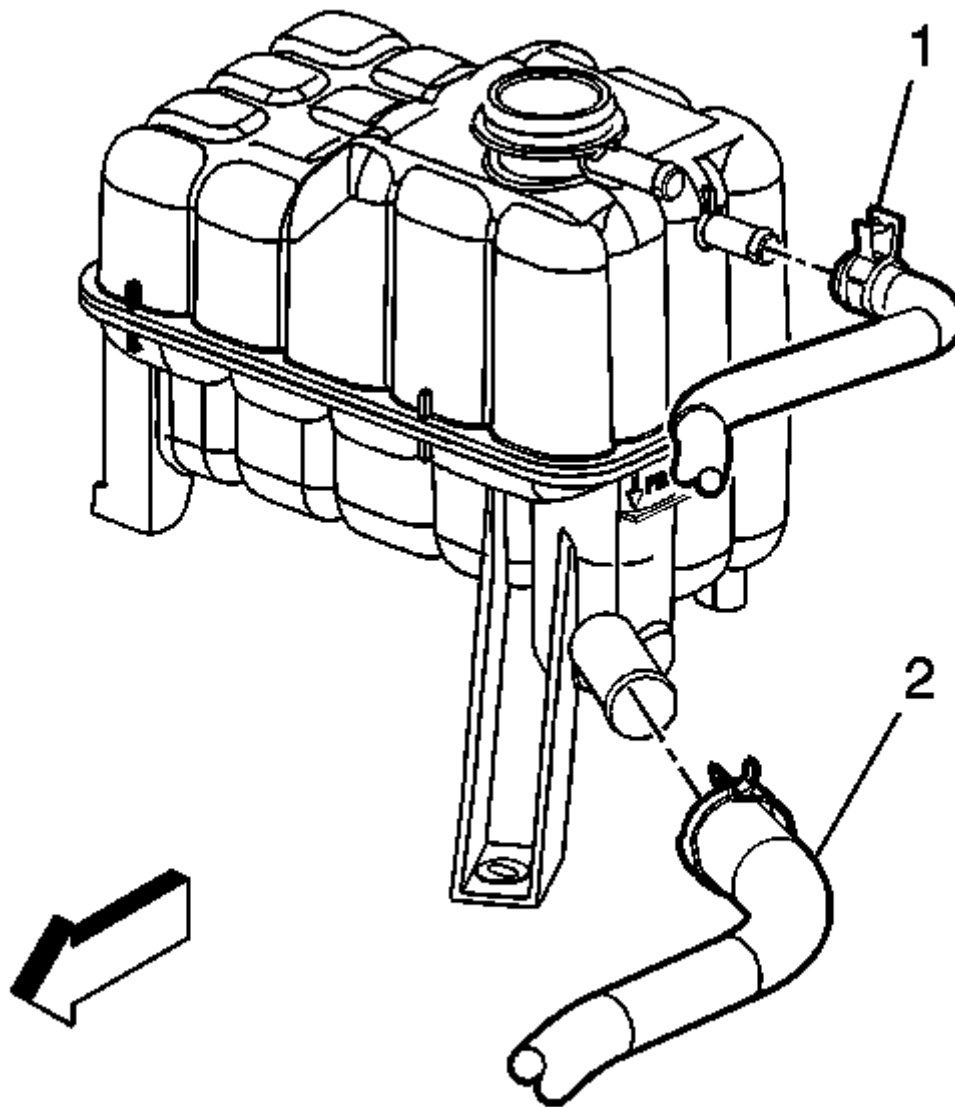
View Of Surge Tank Inlet Hose & Clamp
